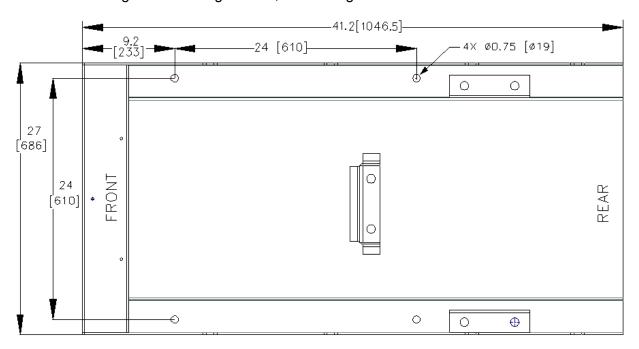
Benchmark 1500/2000 Anchor Bolt Locations
